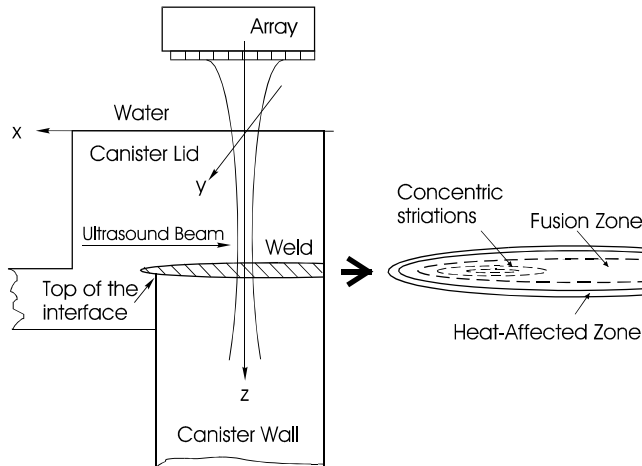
Schematic of EB weld structure and of ultrasonic inspection of the EB weld.
